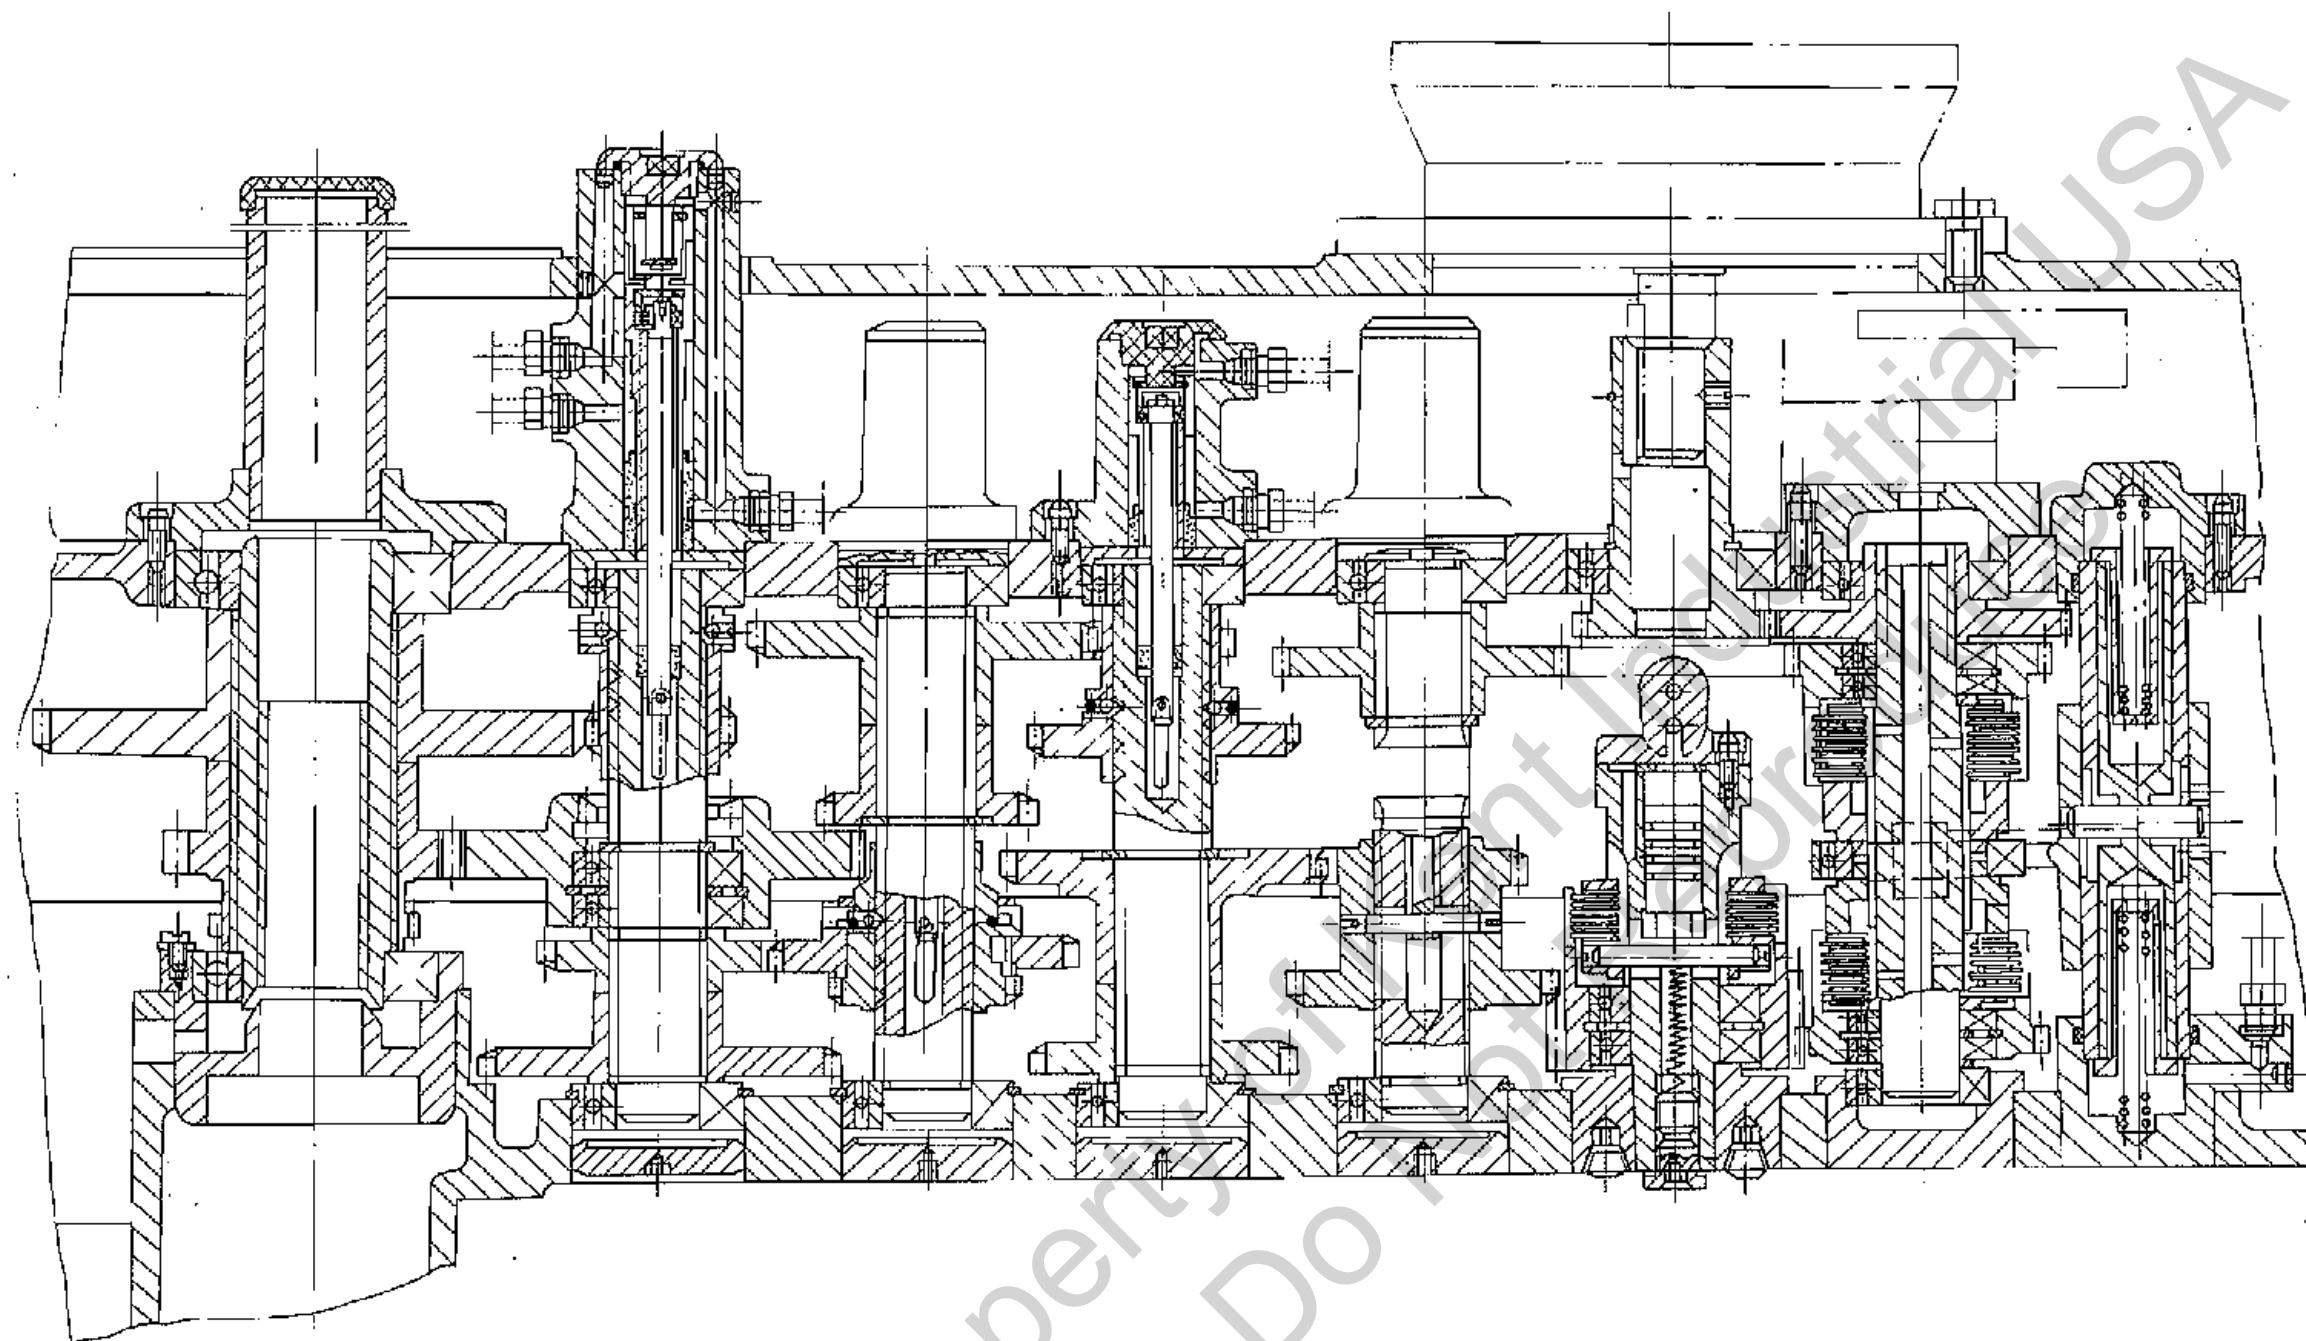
Stretch Drawing of Spindle Speed Change Mechanism
